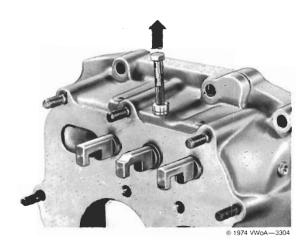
Plug being pulled out (arrow) with the help of a self-tapping bolt.
